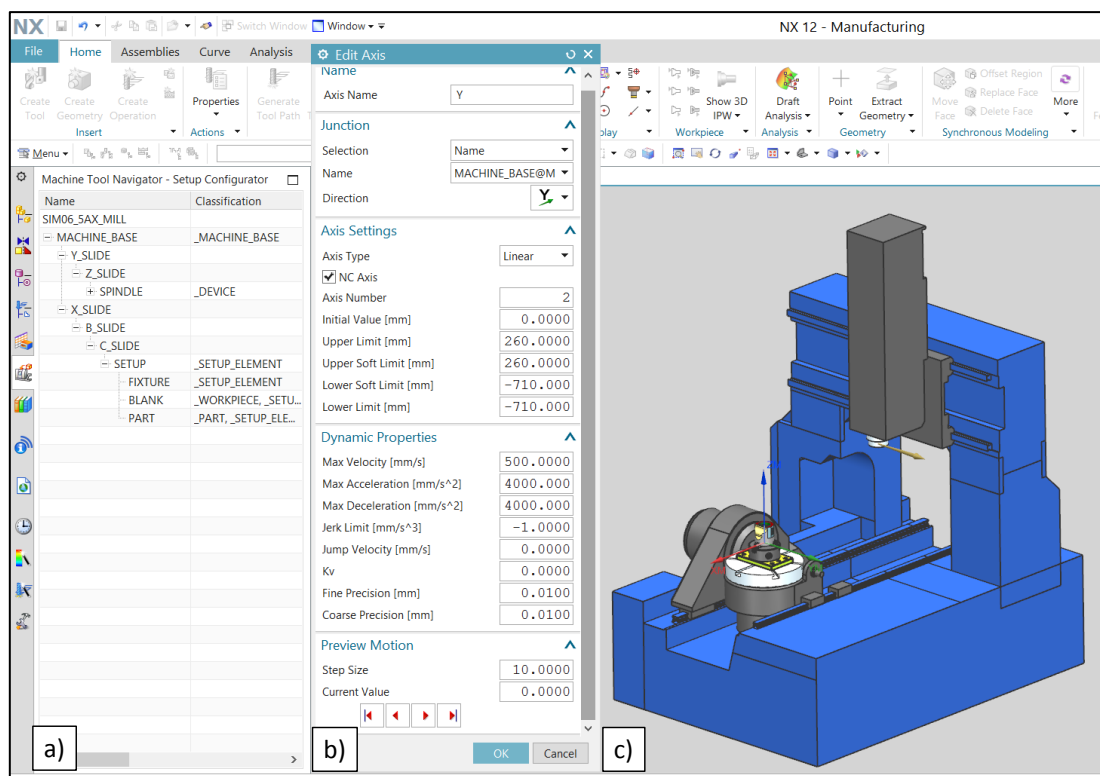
Machine tool simulation module from NX® Siemens, a) machine kinematics, b) axis definition window and c) machine design
